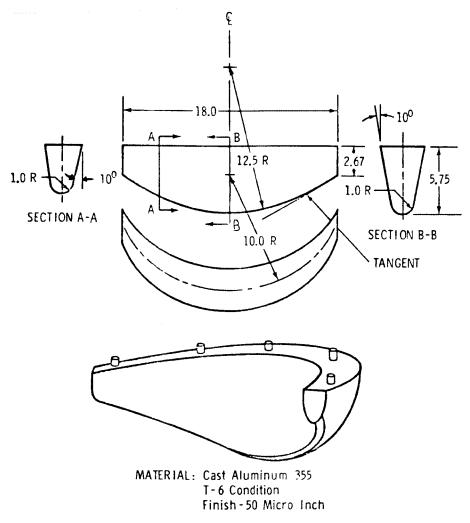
BEAD UNSEATING FIXTURE-DIMENSIONS IN INCHES
